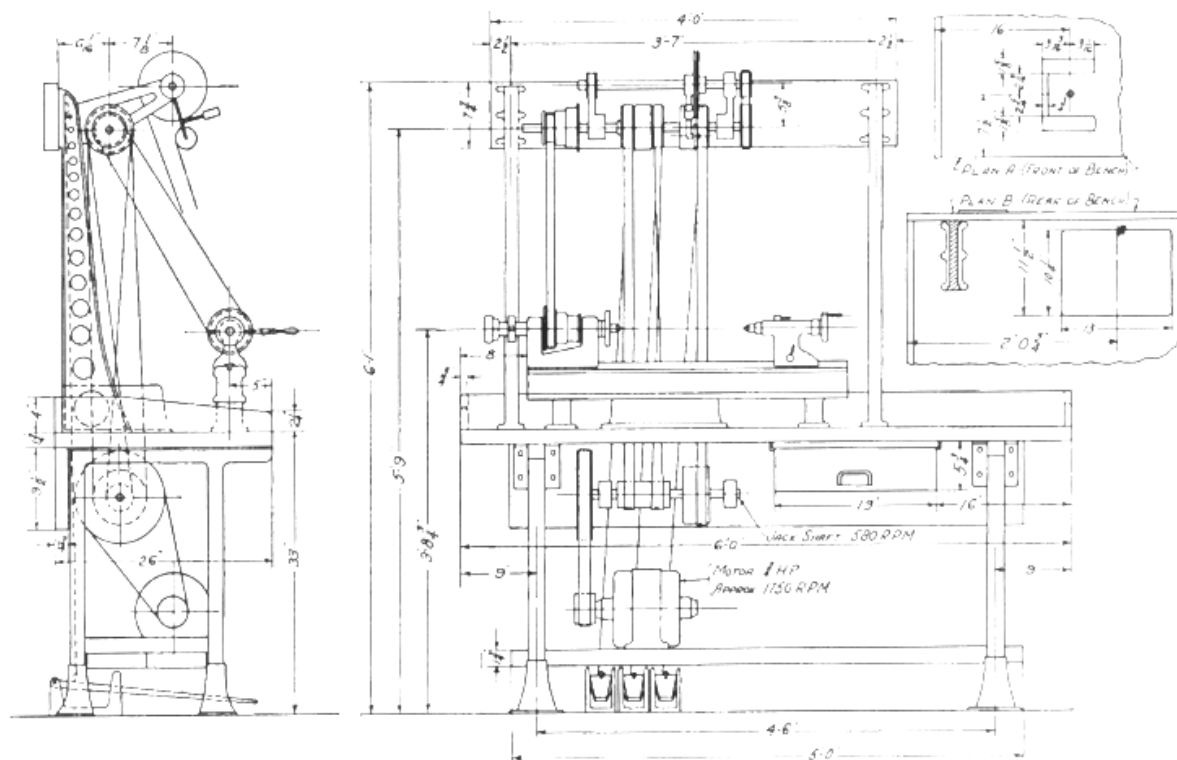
Dimension diagram of Unit Bench, Bench Drawer, Countershaft Plank Supports, Countershaft Plank and Plain Foot Treadles
